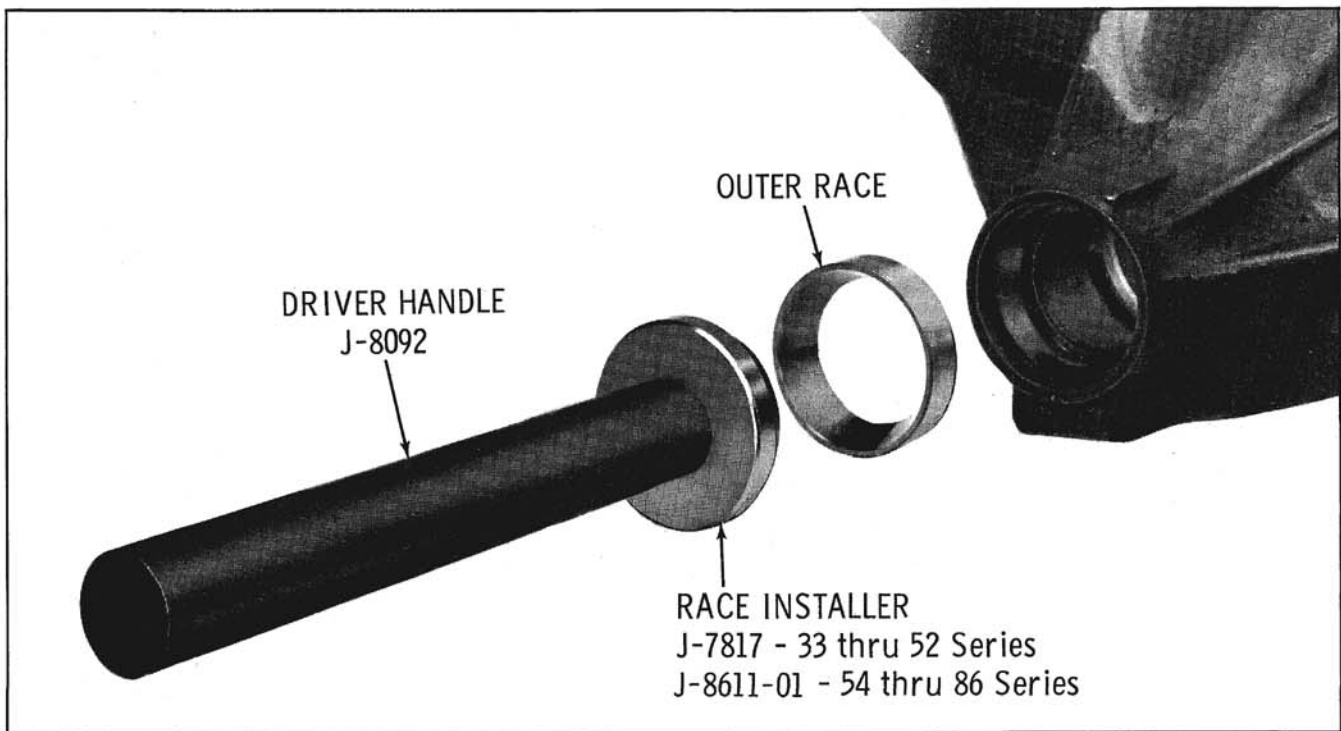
Installing Pinion Front Bearing Outer Race
